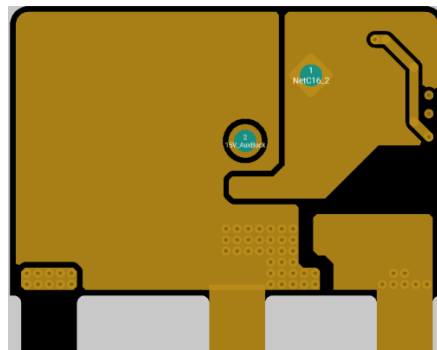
LV auxiliary supply daughterboard layout: inner layer 1
